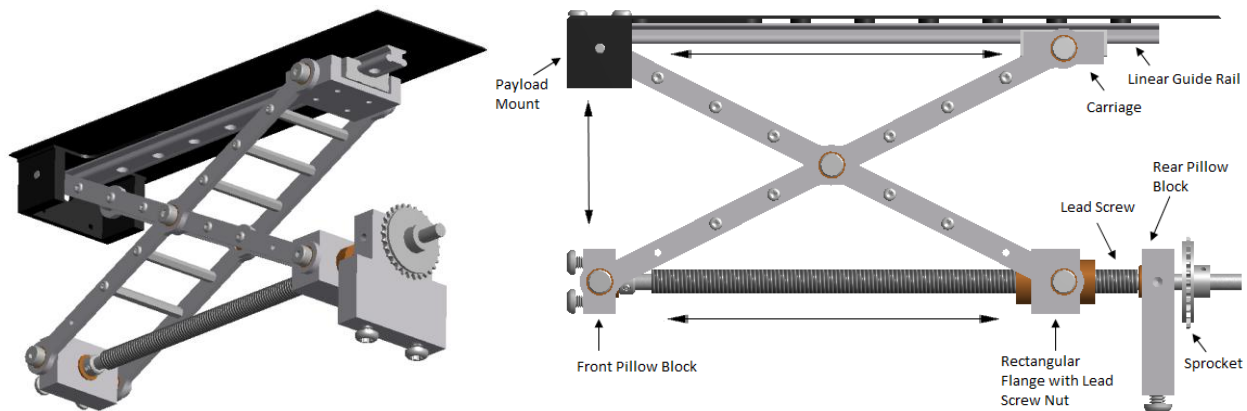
Lead screw and scissor lift assembly with linear guide rail
